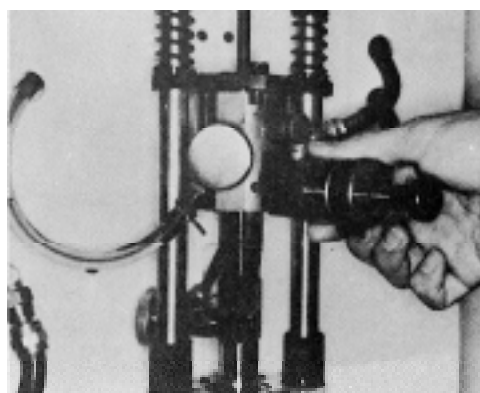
, F60215. Assemble ST-70a tool to pot
